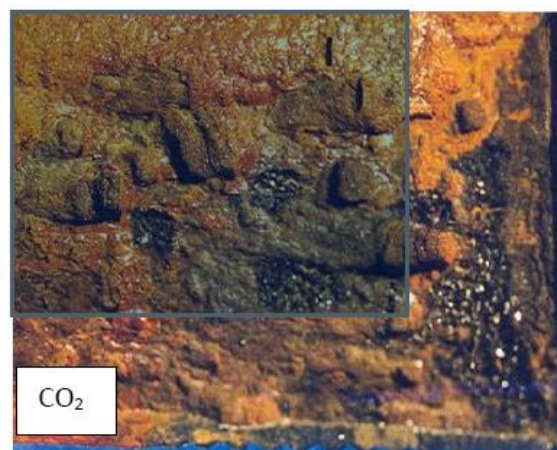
$\text{CO}_2$  pitting corrosion [14]
